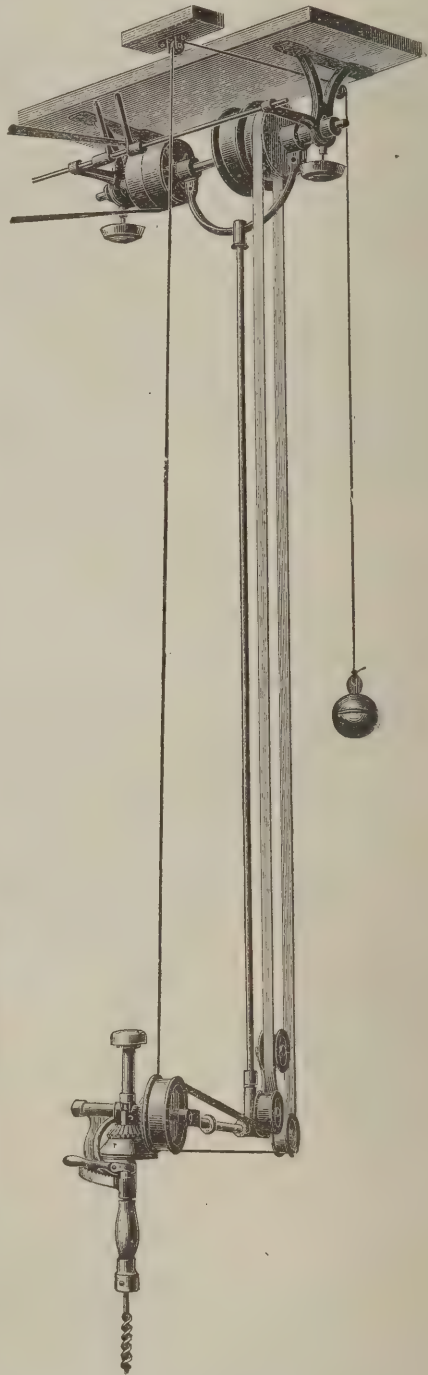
Power Boring and Drilling Machine Built by M. C. Henley, Richmond, Ind.
